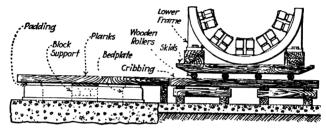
Method of rolling lower half of frame onto bedplate.
